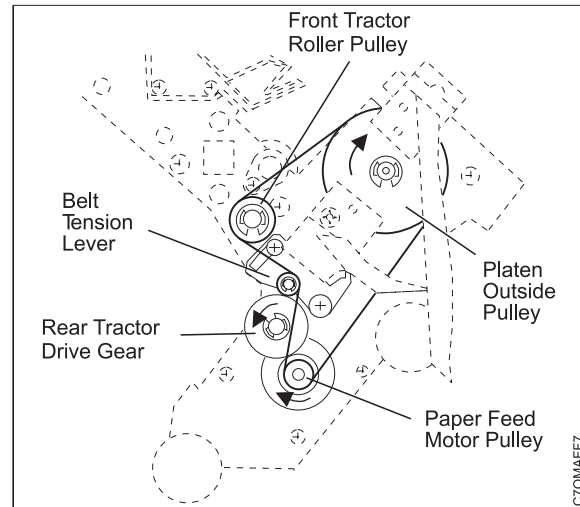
Paper Feed Main Drive. (Viewed From Right Side) Arrows show forward (up) paper feed.
